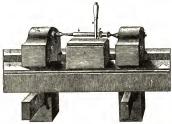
Turning an iron mandrel on a lathe between puppers  $(\tau, \tau)$ . The mandrel (bg) is rotated by means of a cord looped round it which is attached to a foot-readle and a pole. (a) The cutting-tool; (b) the tool-rest.
